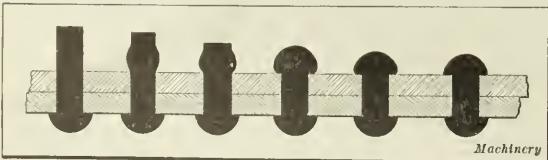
Sequence of Operations in upsetting a Rivet in Electric Welding Machine
